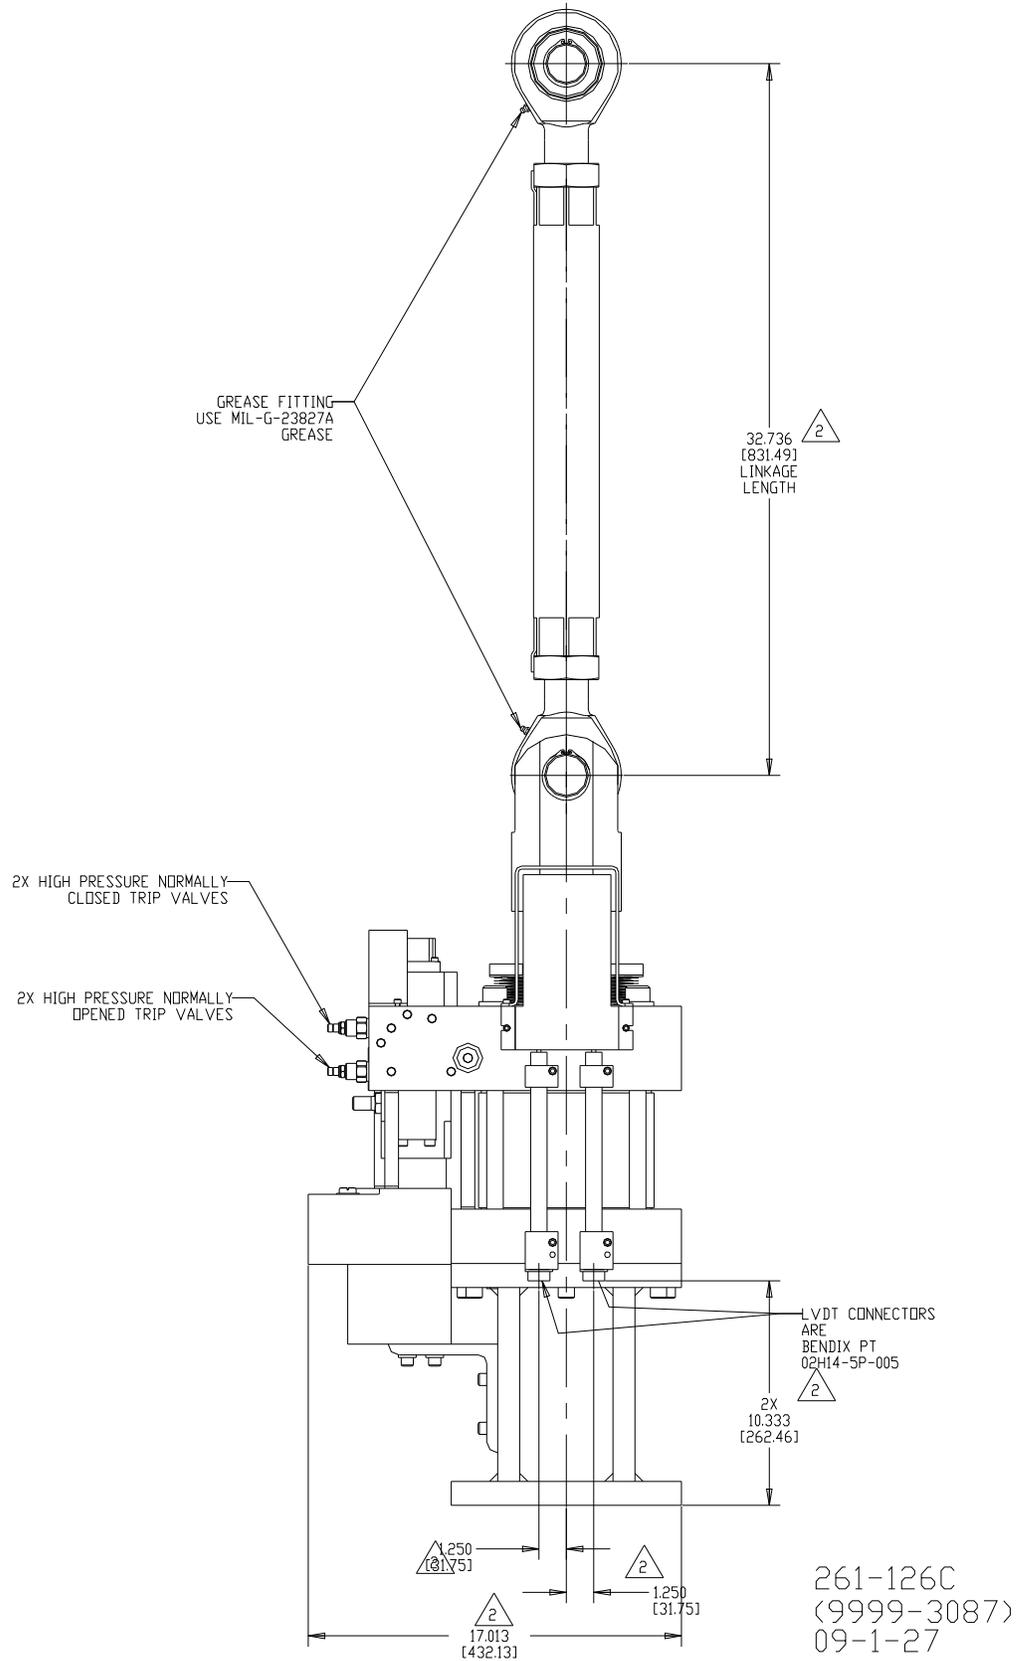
9F IGV Actuator, High Pressure Trip with Internal Check Valve (right side view)
